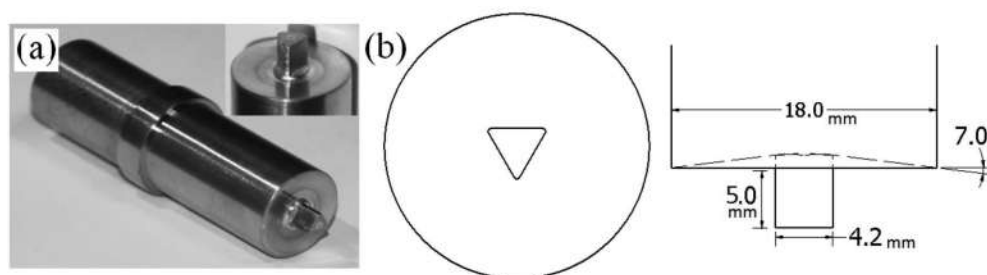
Tool used: (a) Schematic illustration of the tool and its dimensions, (b) A magnified cross sectional view of the tool.
